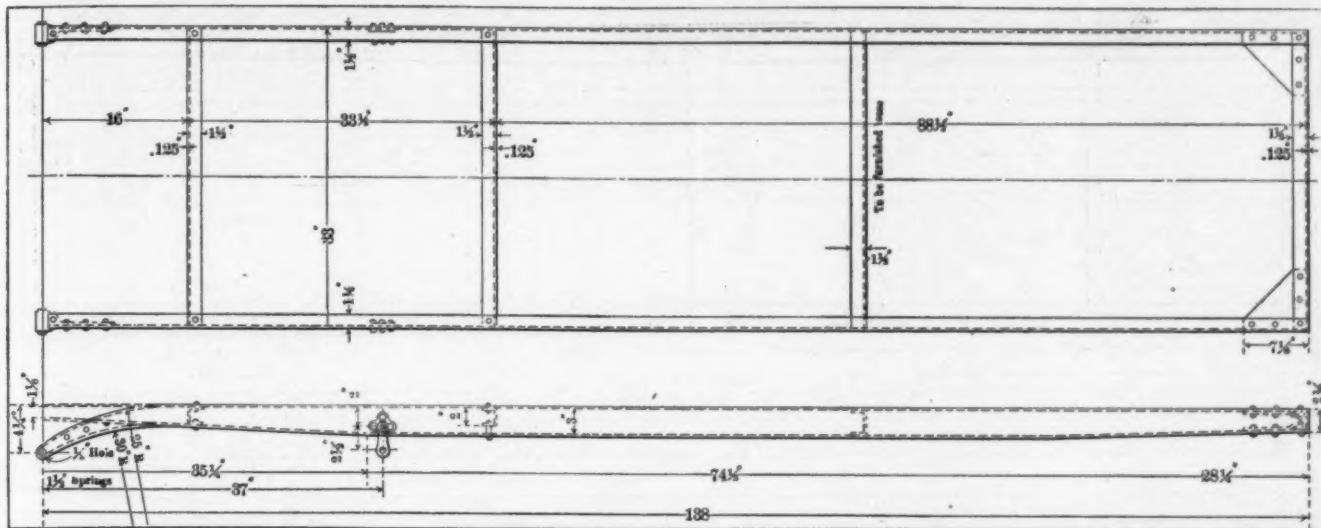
Schacht frame in plan and elevation, showing straight front and rear, and four stout cross members well disposed
